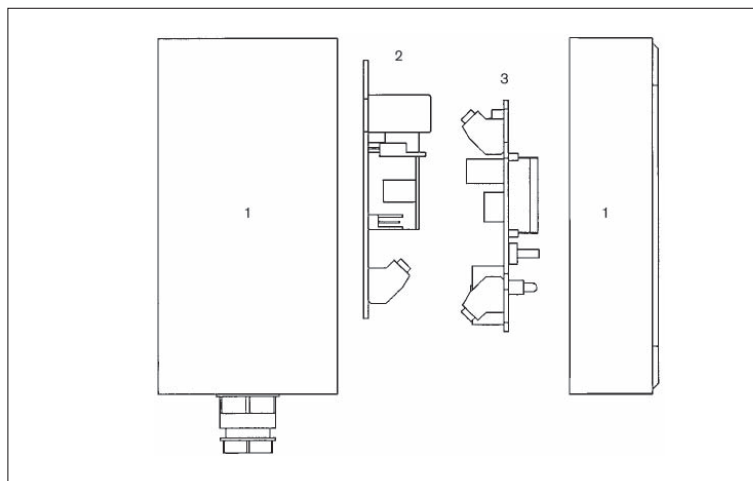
Spare parts explosion drawing 8205 wall-mounted version
